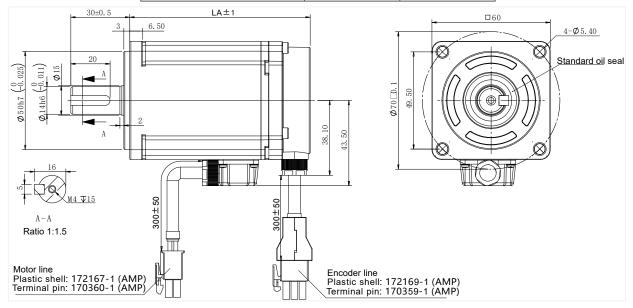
Installation dimension of WD series 60 flange servo motor
